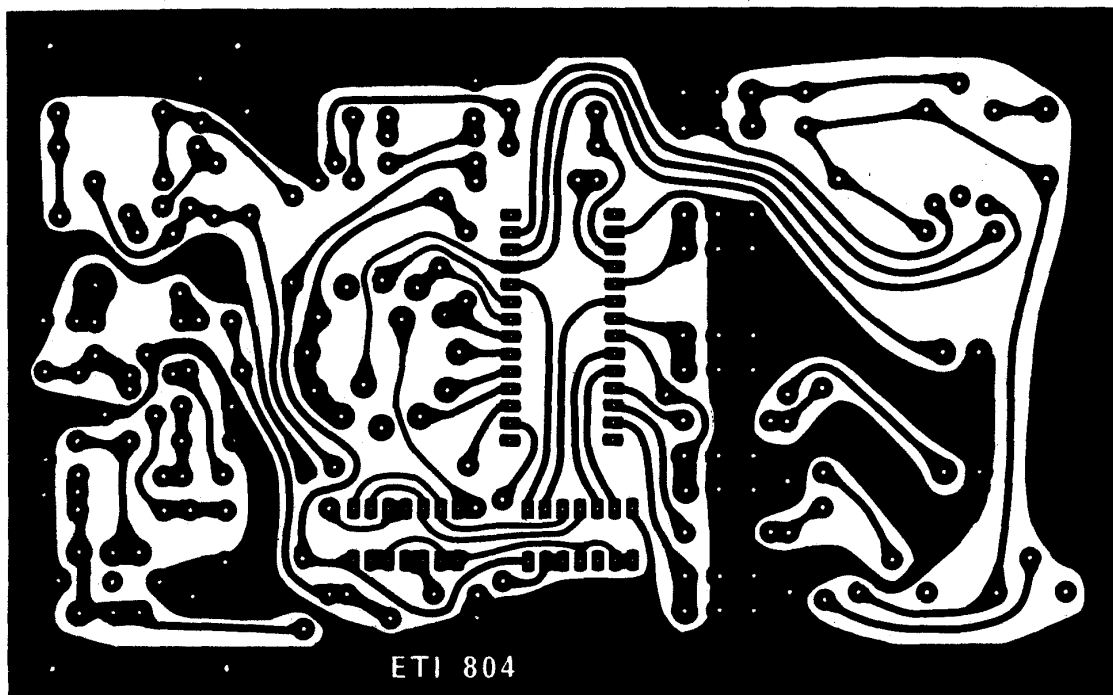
Printed-circuit layout. Full size 163mm x 102mm.
